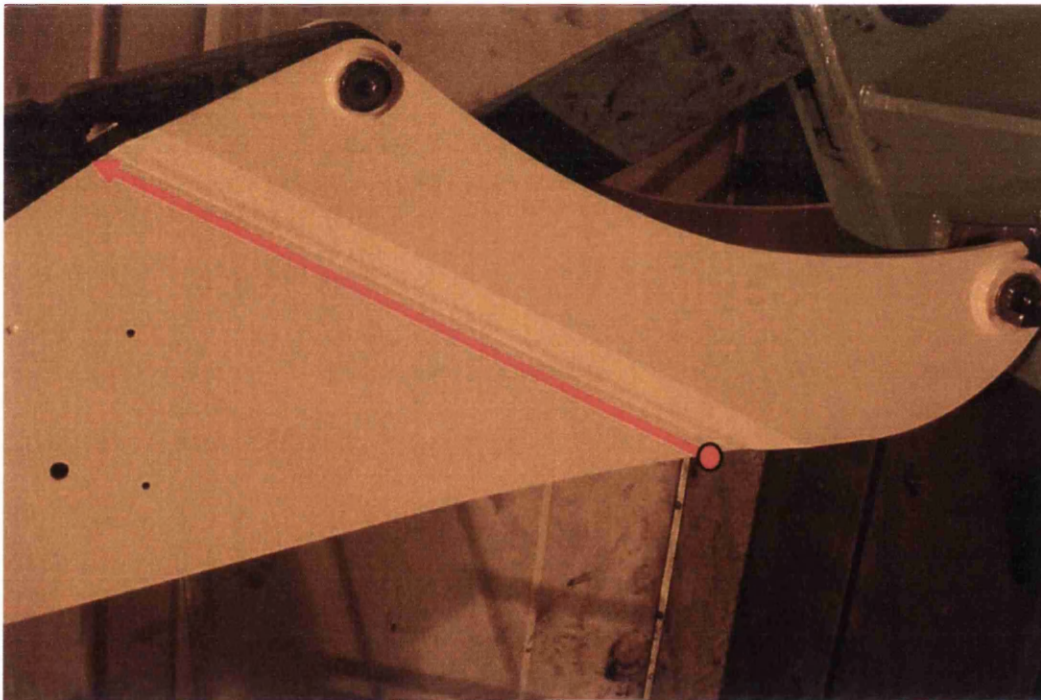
Keyhole casting weld toe - Structural stress profiles for slew and excavating load
